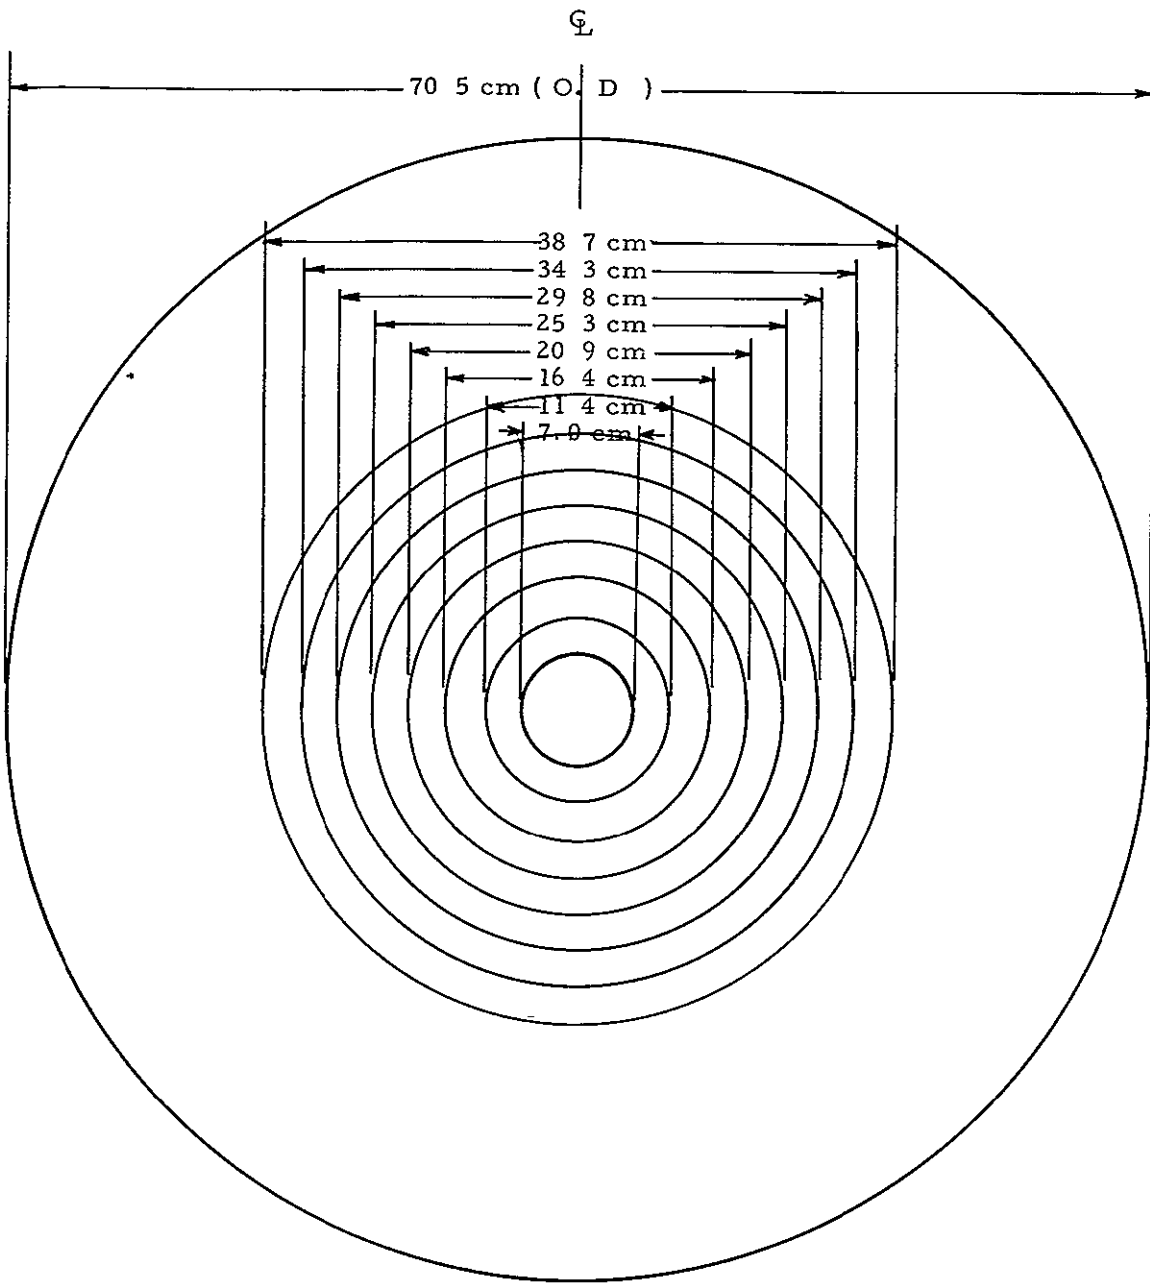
3 Layout of fuel rings for 3 module reactor fuel element
